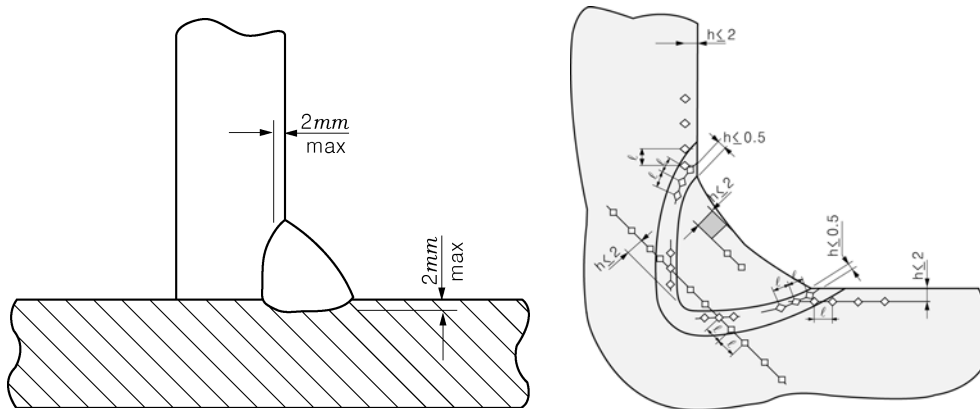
Hardness test for fillet welded joint (unit : mm)
